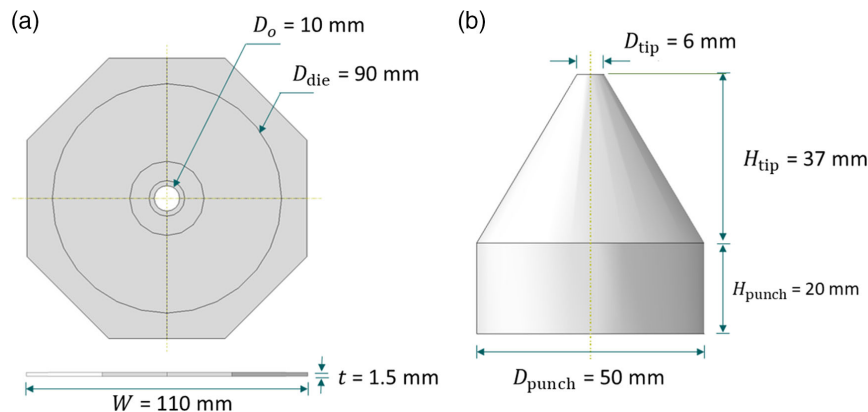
a) Hole expansion sheet dimension and b) conical punch dimension.
